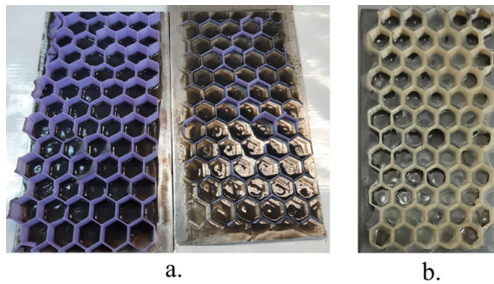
Fractured PLA honeycomb during shear testing: (a) – PLA specimen; (b) – ULTEM specimen.
